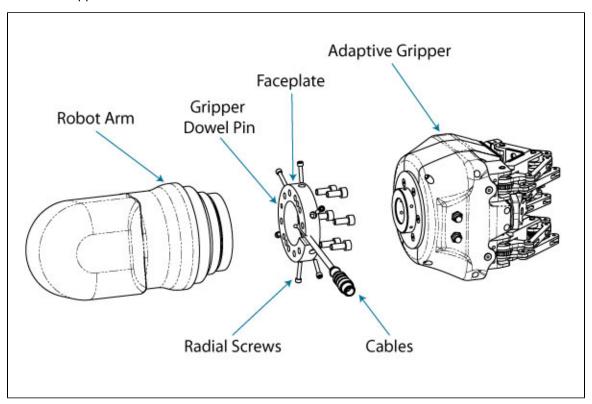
Attaching the Adaptive Gripper S-Model to a robot arm with the Faceplate.
